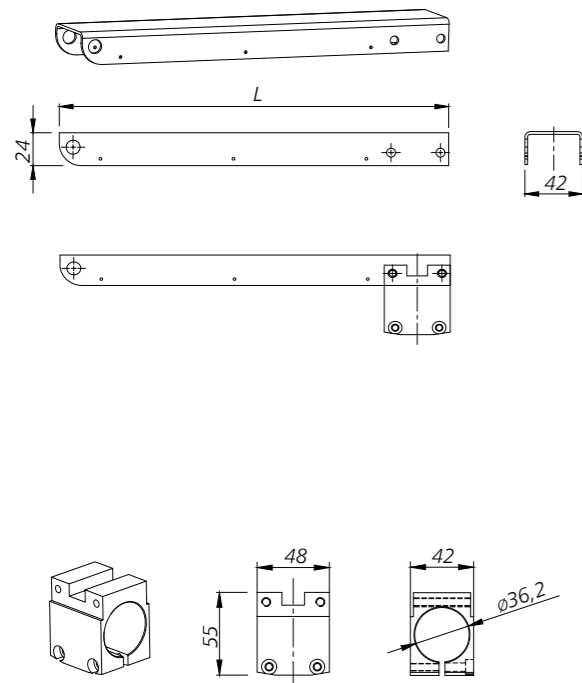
Sliding console for mounting type S spindle actuator with shifted pivot point on the smoke exhaust window, dimensions [mm]
